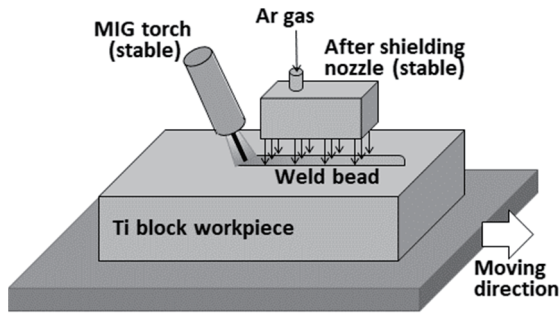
Schematic diagram of setup for MIG titanium welding.
